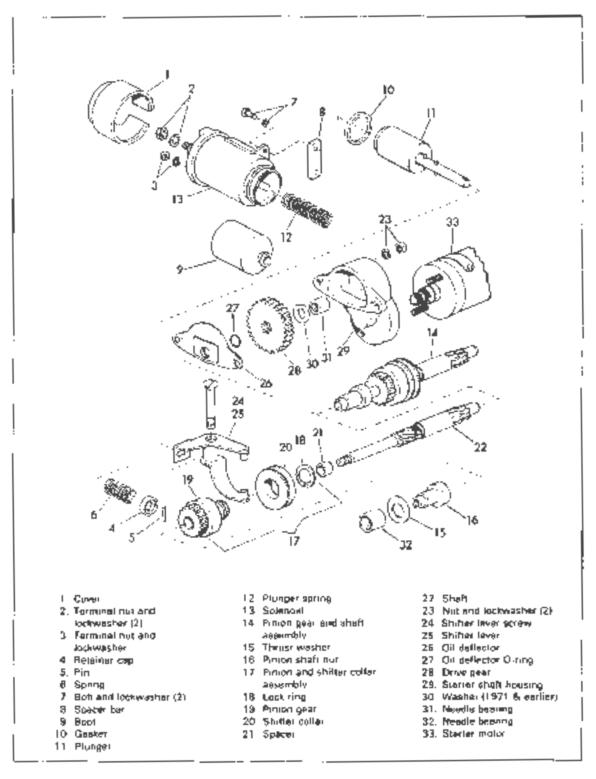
Starter Shaft, Housing and Sciencid - Exploded View
